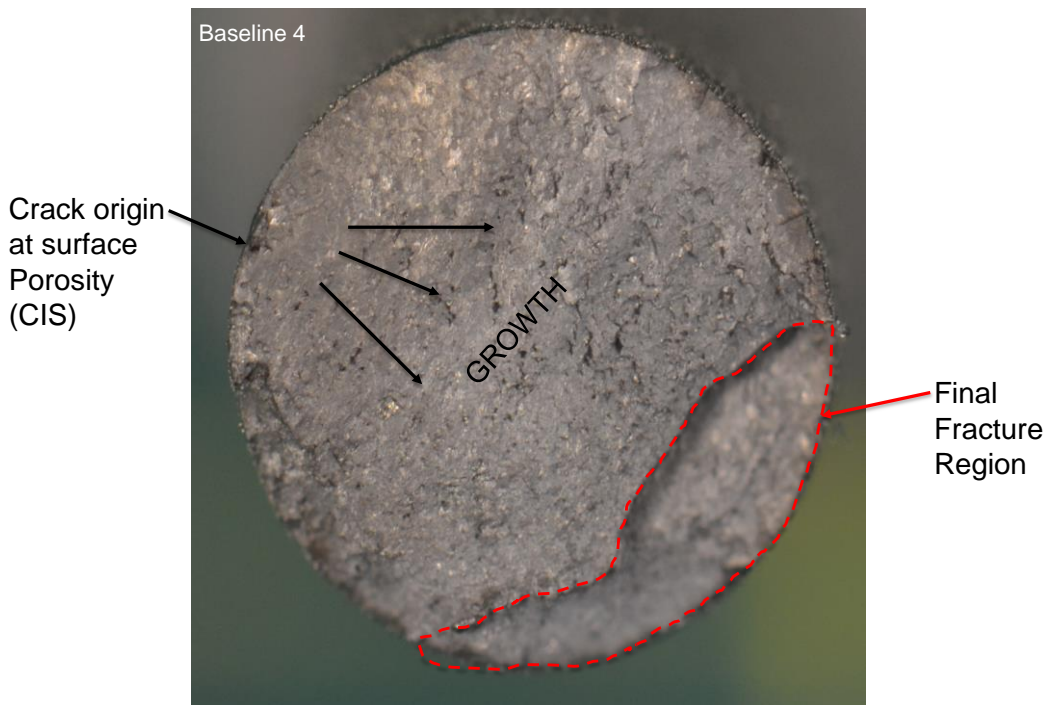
Fracture Surface Photograph of Baseline Specimen 4 ~10X Magnification
